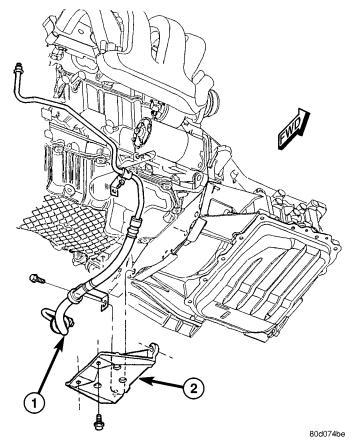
PRESSURE HOSE ROUTING - 2.0L ENGINE
